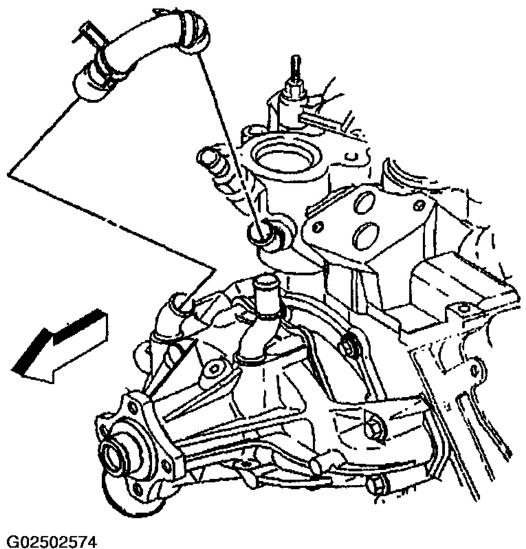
Removing Coolant By-Pass Hose & Clamps Courtesy of GENERAL MOTORS CORP.
